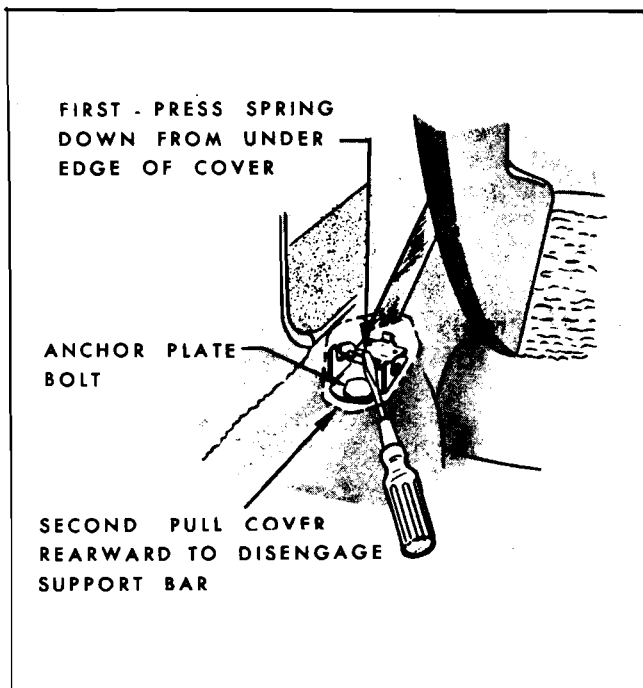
Front Seat Belt Self-Locking Retractor - Removal
